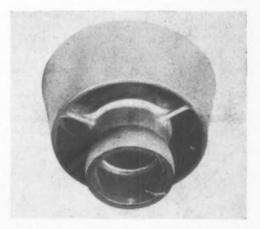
Flame Tube Head and Swirler Assembly Copper-brazed in Hydrogen
